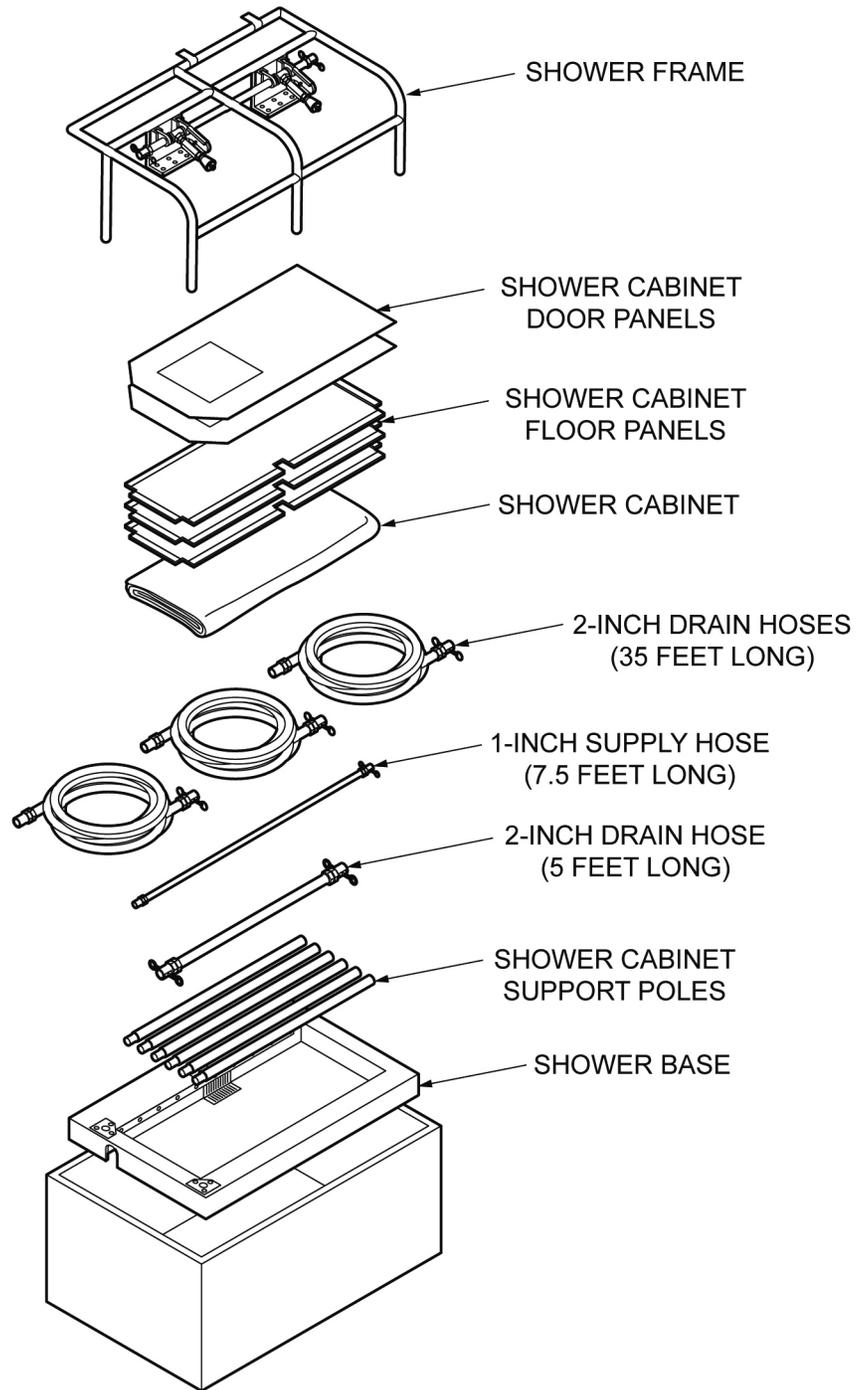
Packing the 12-Head Shower (Sheet 3 of 6).
